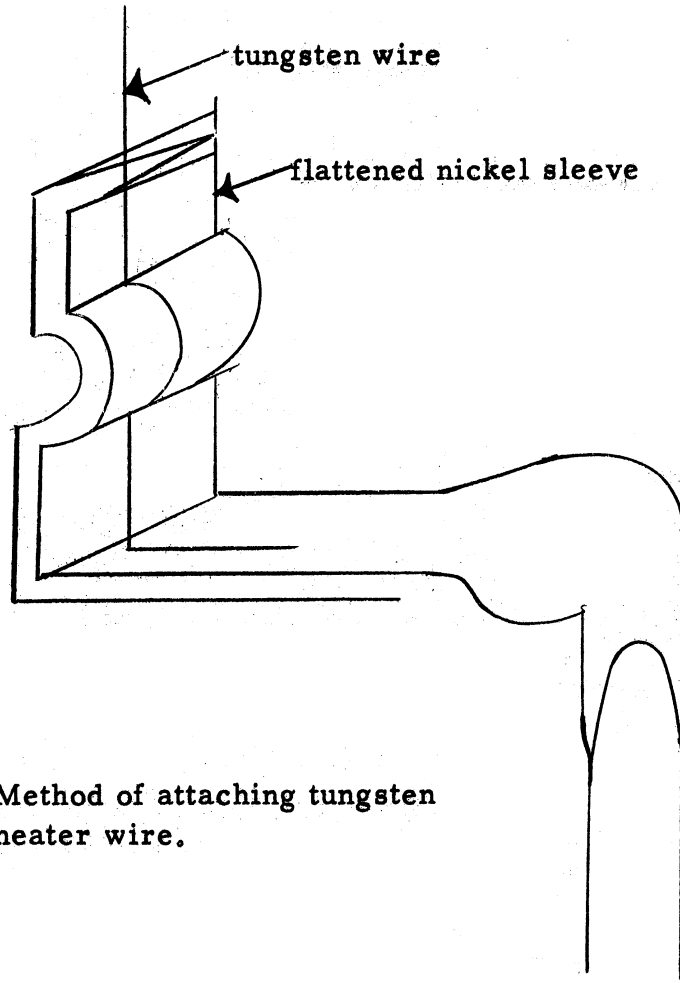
Method of attaching tungsten heater wire.
